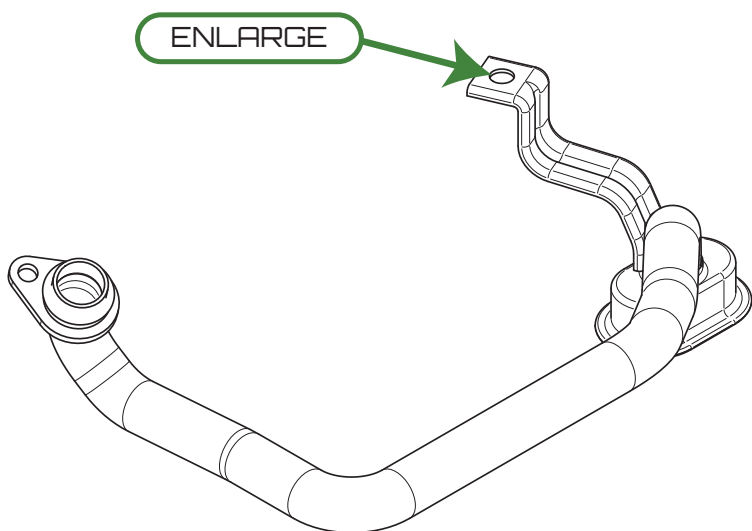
Hole to Enlarge on the Pickup Tube (Screen)
